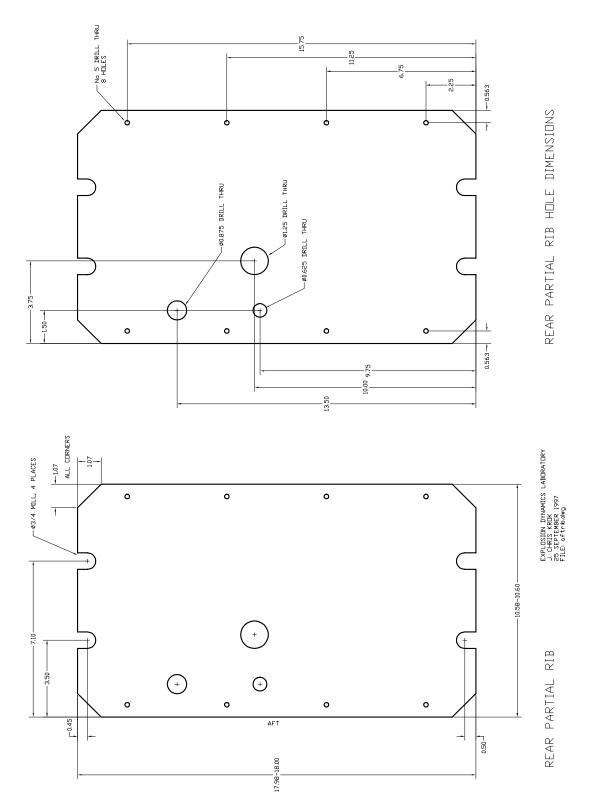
Aft partial rib hole layout for 1/4-scale facility.
